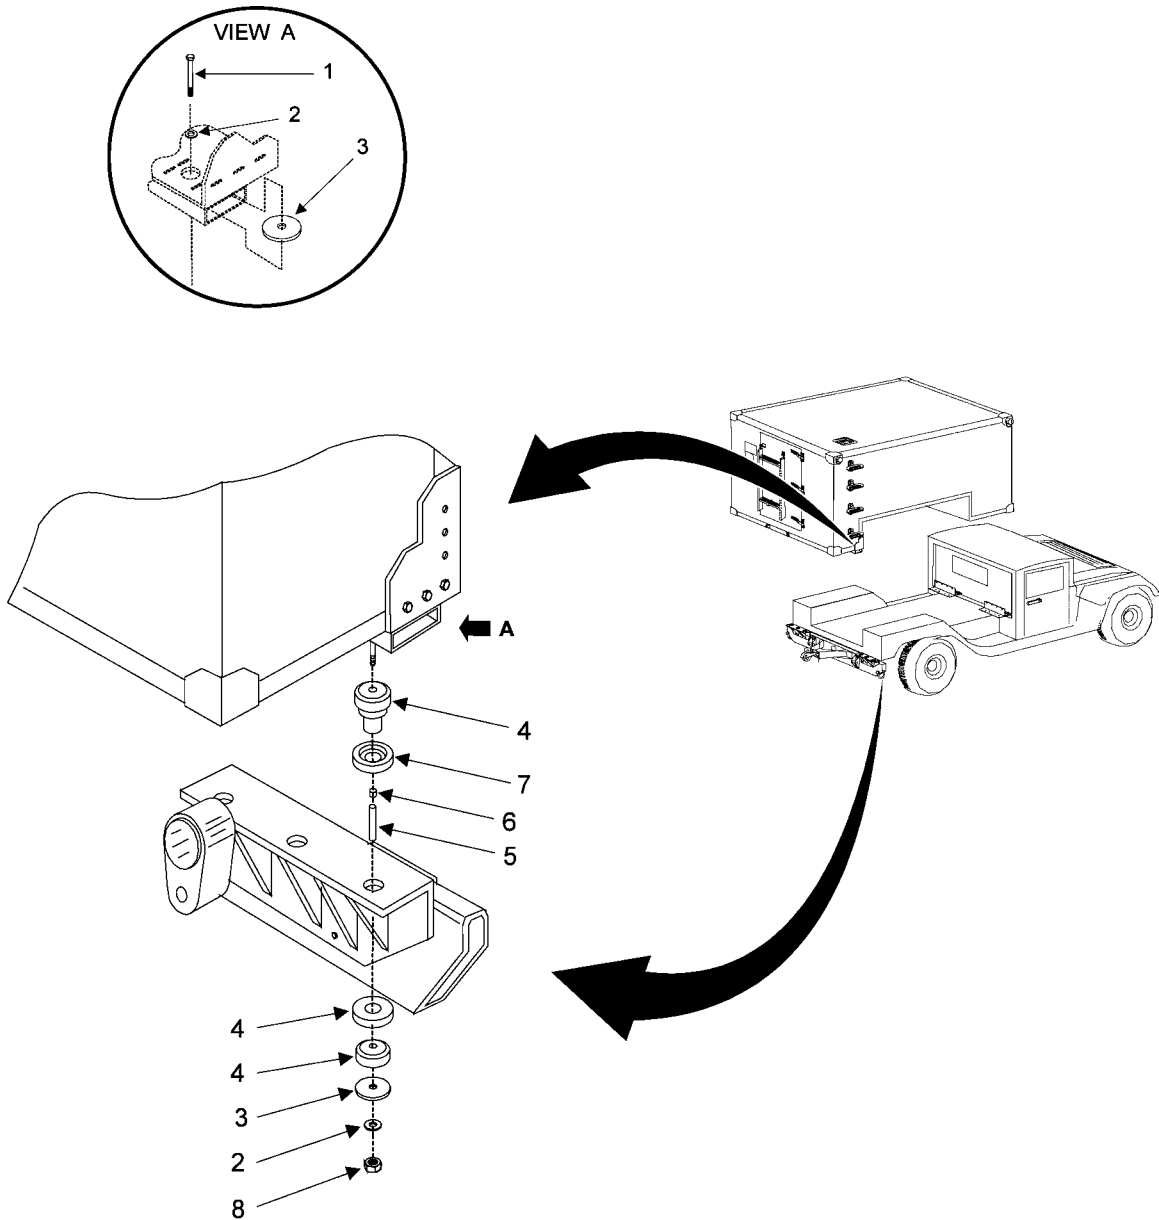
Shelter Mounting Assembly-Rear Bracket 2
